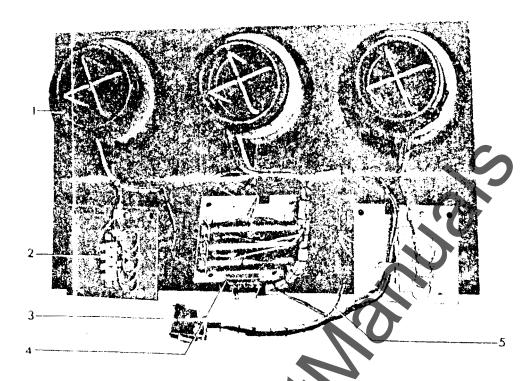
(b039646) Magnetic Coil Assembly for Ak-3 75, 100 Breakers (Only) (Mounted on Assembly Fixture)
